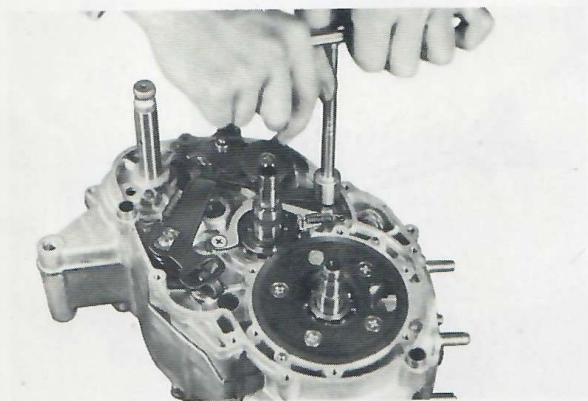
Loosening shifting cam stopper bolt with 12 mm wrench
